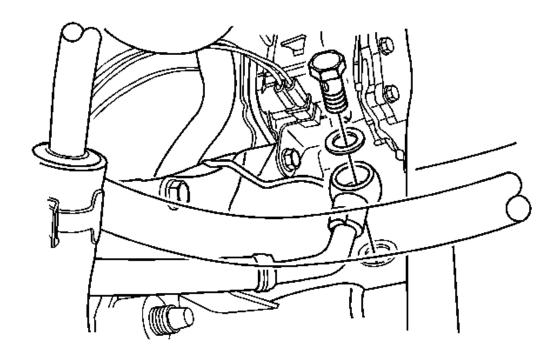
View Of Oil Cooling Lines & Bolt Courtesy of GENERAL MOTORS CORP.
